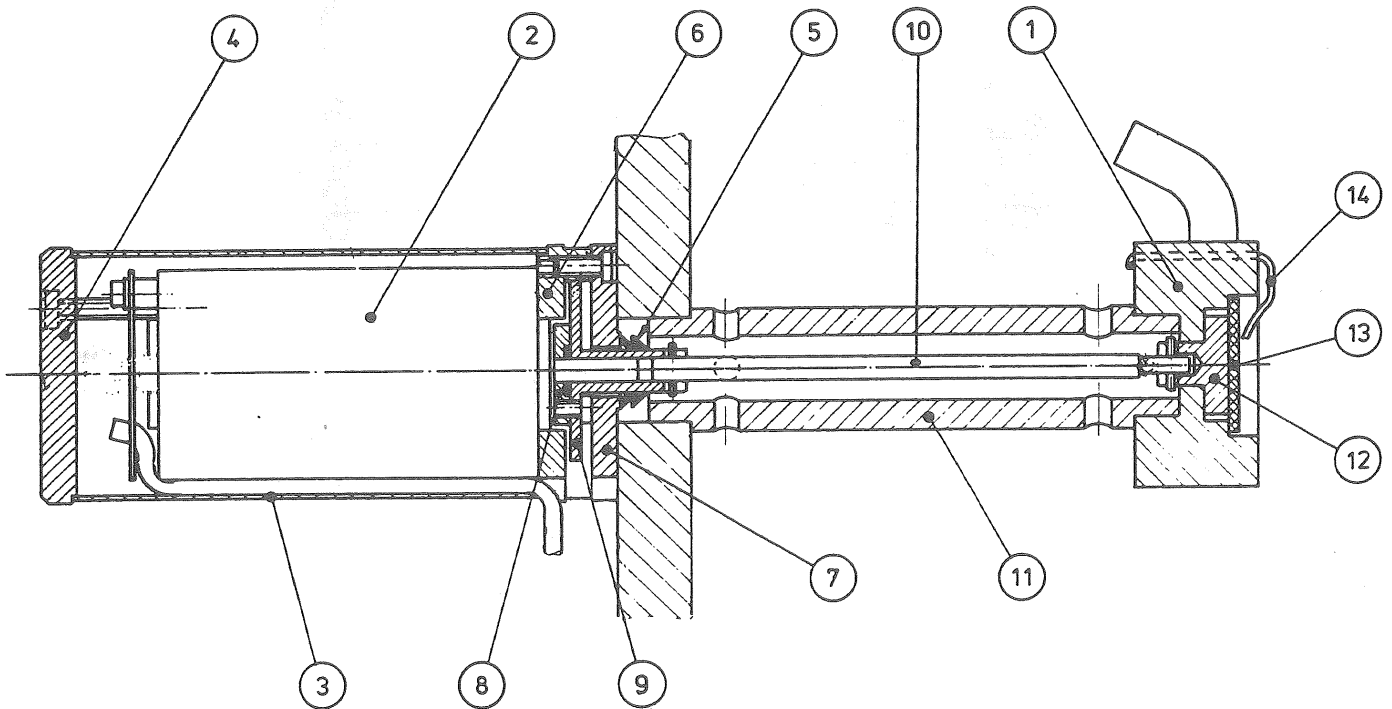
, Polishing unit, complete, Drawing 14080045A)
